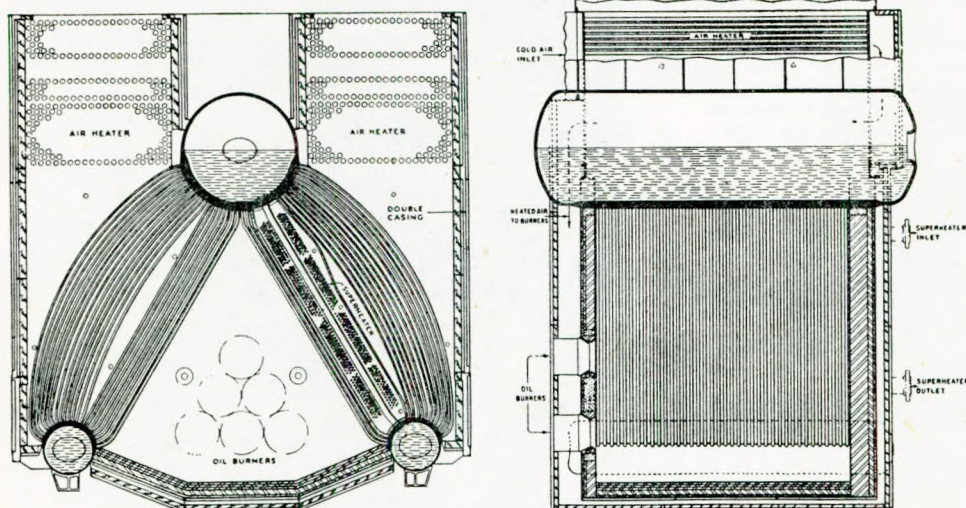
Front view and longitudinal sections of three drum boiler with superheater and air heater.
